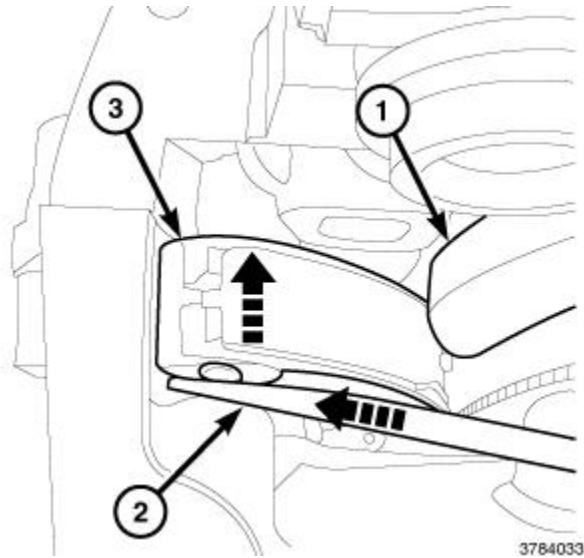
Timing Chain Holder, Trim Stick & Tensioner Arm
